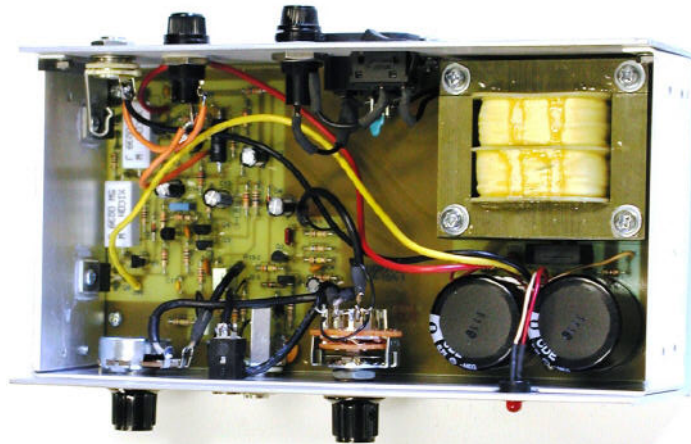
Inside view showing the printed circuit board and chassis wiring.
